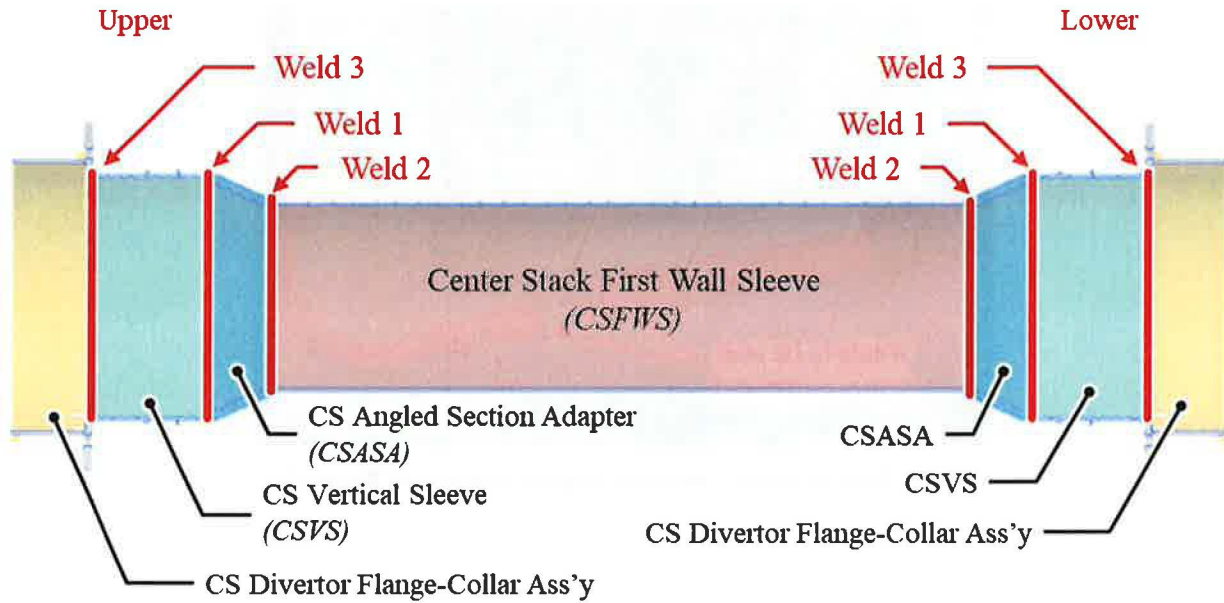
Vacuum-Air Boundary Welds to be NDT and leak tested on the CSC
